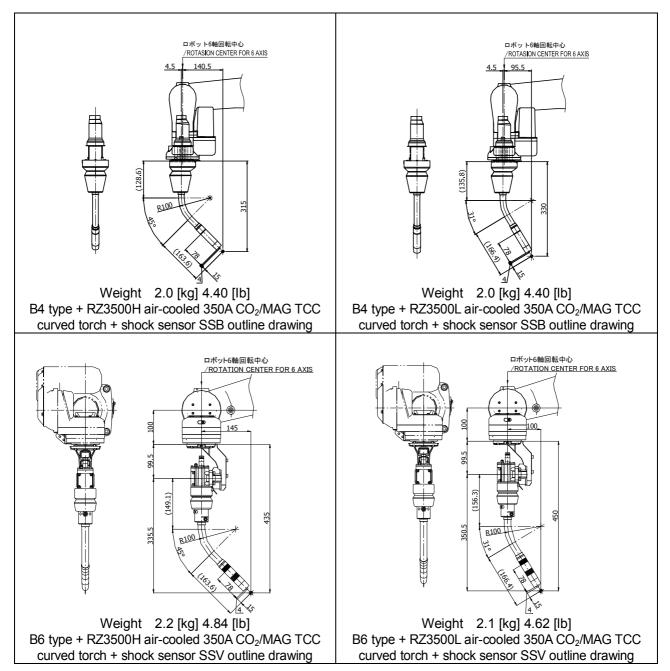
Outline drawing of Air-cooled 350A TCC torch (High rated duty cycle type) (for B4 type, B6 type) Unit (mm)
